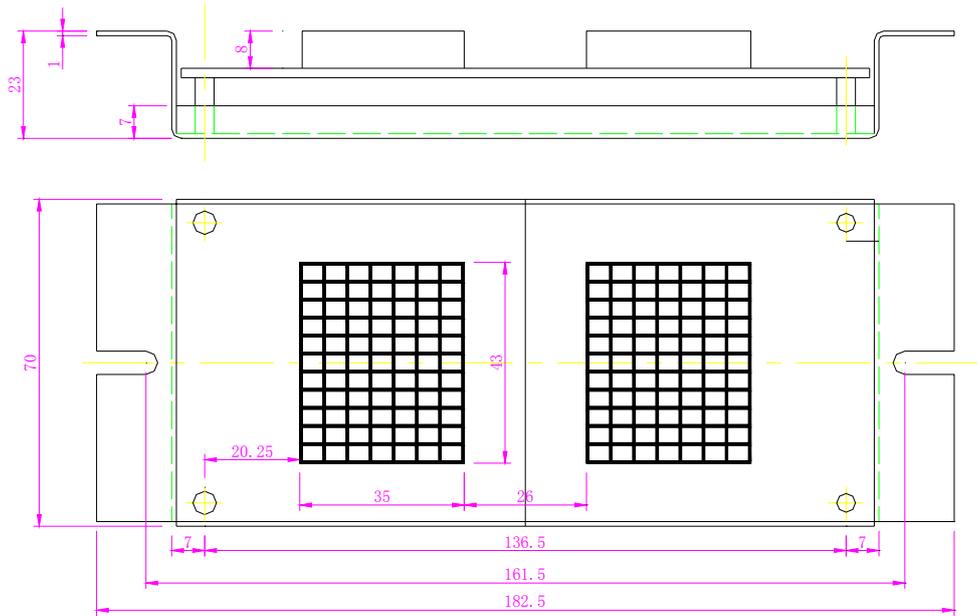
(B) Mounting Dimensions of SM-04-VSC
